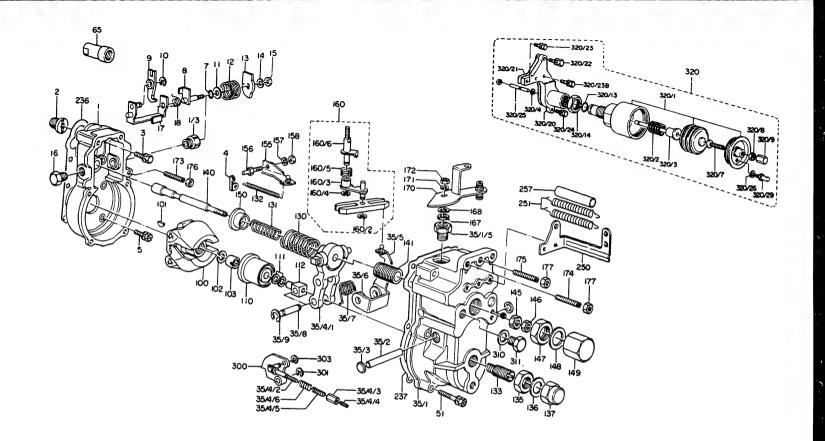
Exploded view of the standard type aneroid compensator-equipped RLD-A governor
